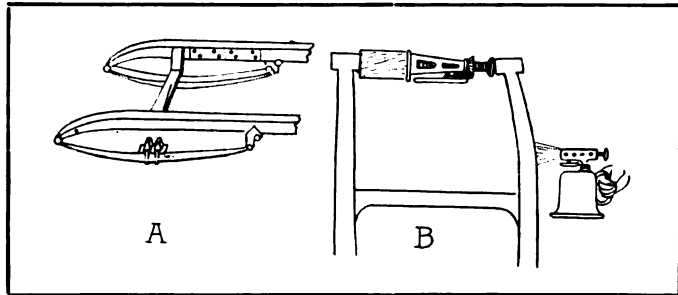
A, Repairing Cracked Frame; B, Straightening Bent Frame with Jack and Blow Torch.
